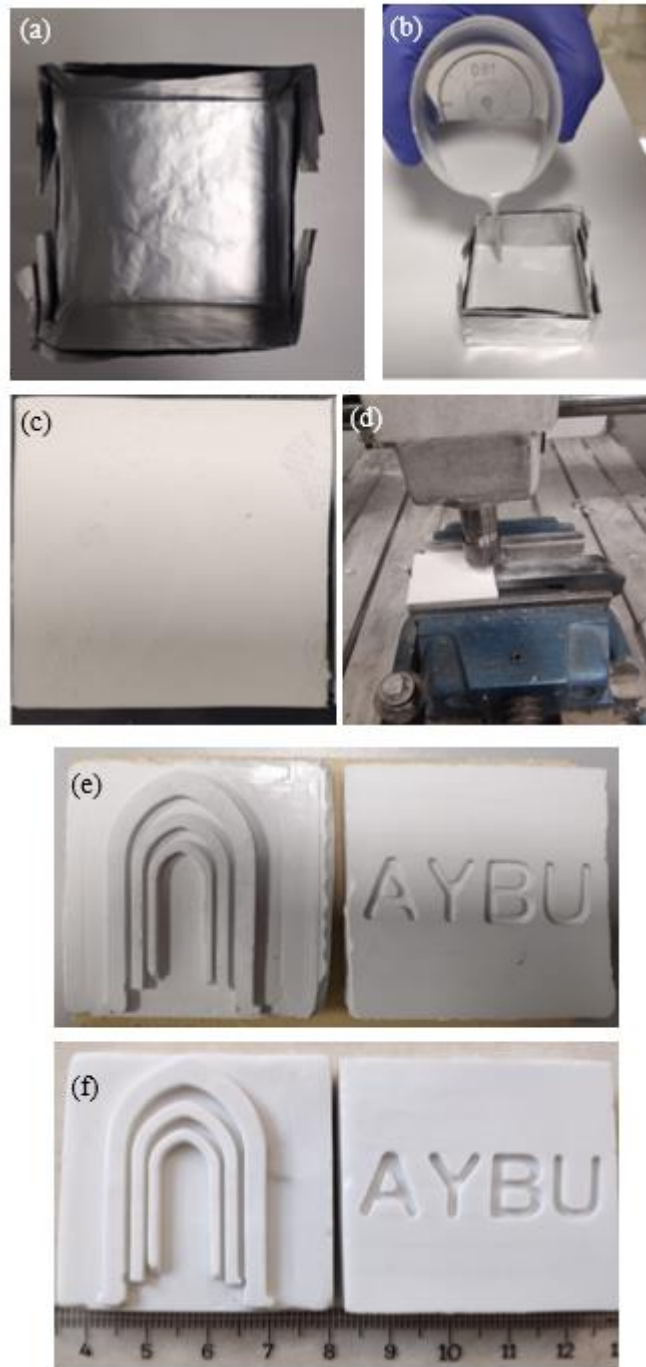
Stages of prototype gel casting process; a) aluminum mold, b) gel casting of a slurry, (c) cured and dried green ceramic, (d) green machining by a CNC machine, (e) green-machined ceramics and (f) sintered ceramics
